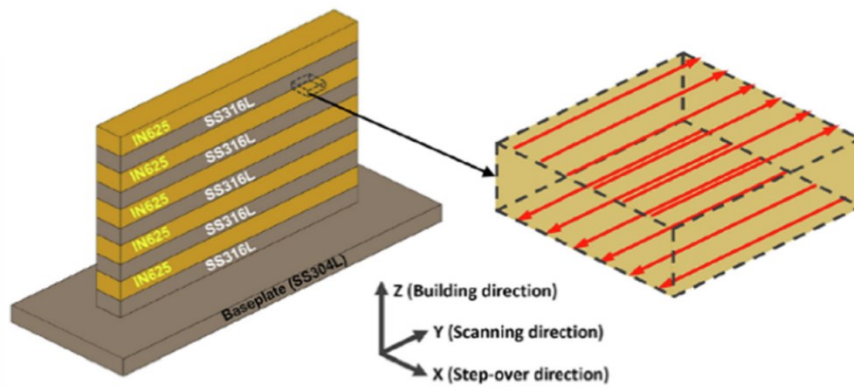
Example of multi-material manufacture between layers: AISI 316L - Inconel 625 [70].
